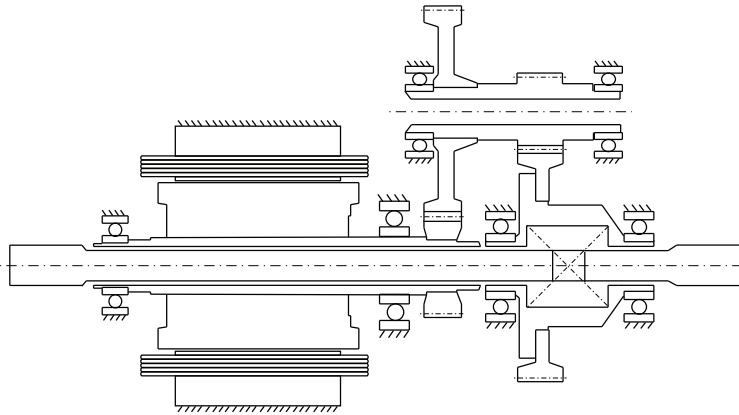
A schematic illustration of the Chevrolet Bolt powertrain layout, featuring a hairpin wound stator, interior permanent magnet rotor, 6 bearings, two hollow shafts, 4 helical gears, 4 differential gears and two driveshafts.
